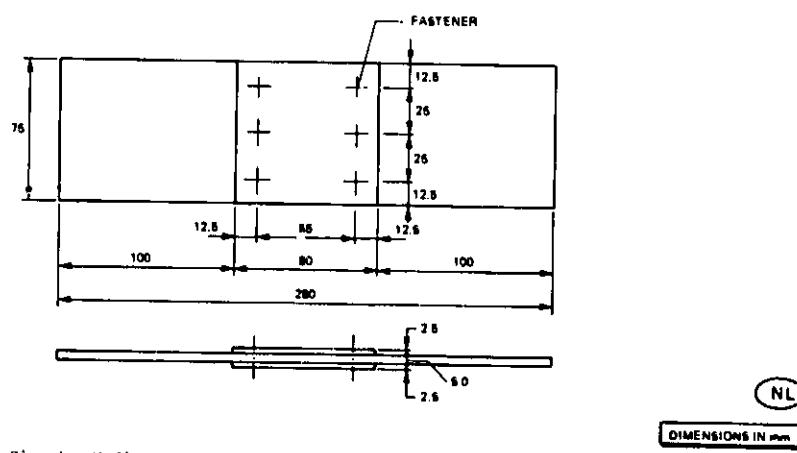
Medium load transfer double shear joint, type M1 - the Netherlands
